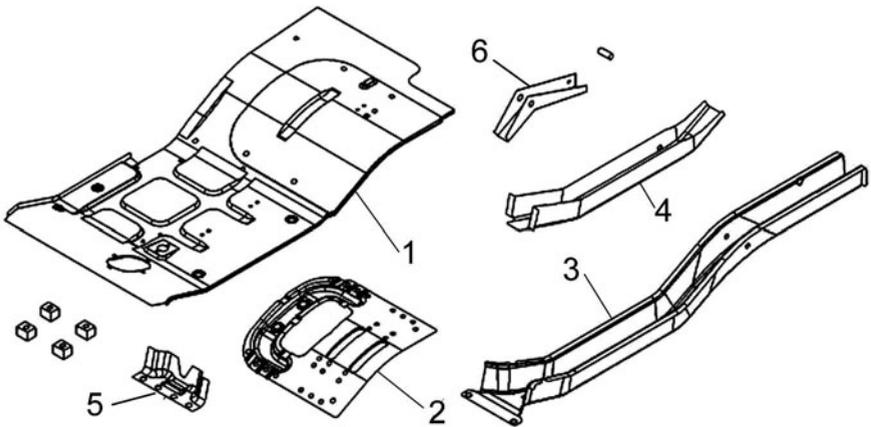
Sheet stamped elements of a cabin RH floor: 1) RH side floor; 2) RH floor reinforcement; 3) RH rail; 4) RH rail extension; 5) RH rail front end brace; 6) RH rail rear end bracket.
